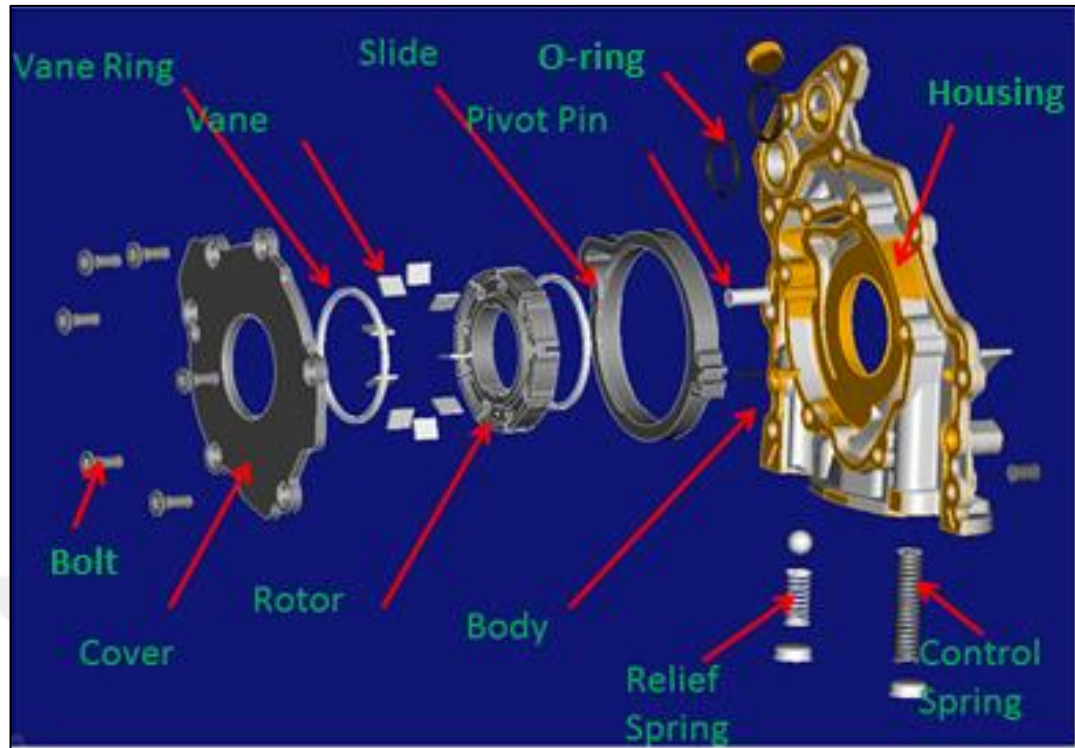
Exploded view of an on-axis variable vane pump (Stackpole International Fluid Power Solutions archive, 2018)
